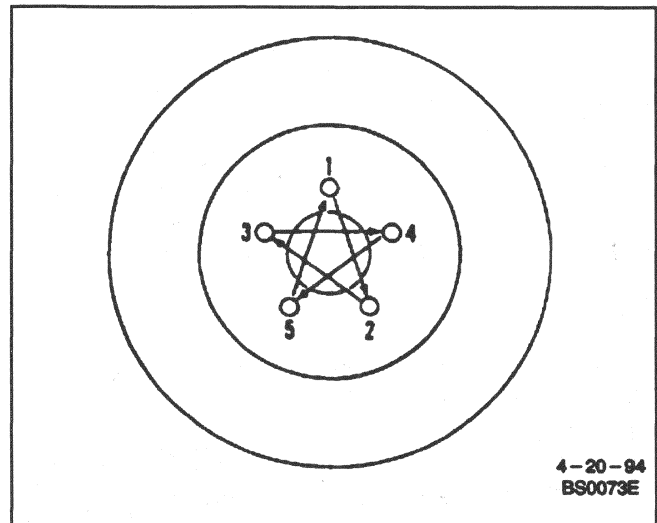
Five Hole Wheel Nut Tightening Sequence
